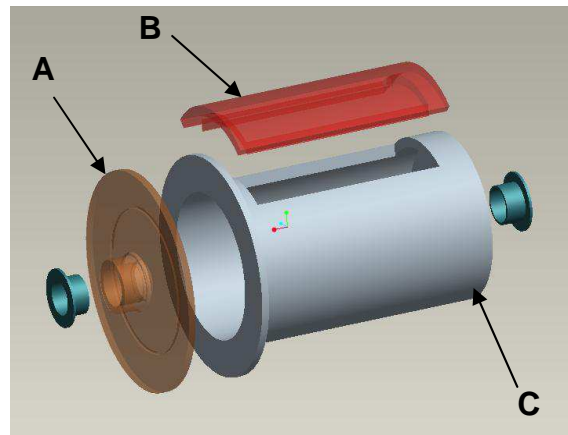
Exploded view of mill assembly. A – end flange, B – feed inlet/outlet and C- mill chamber
